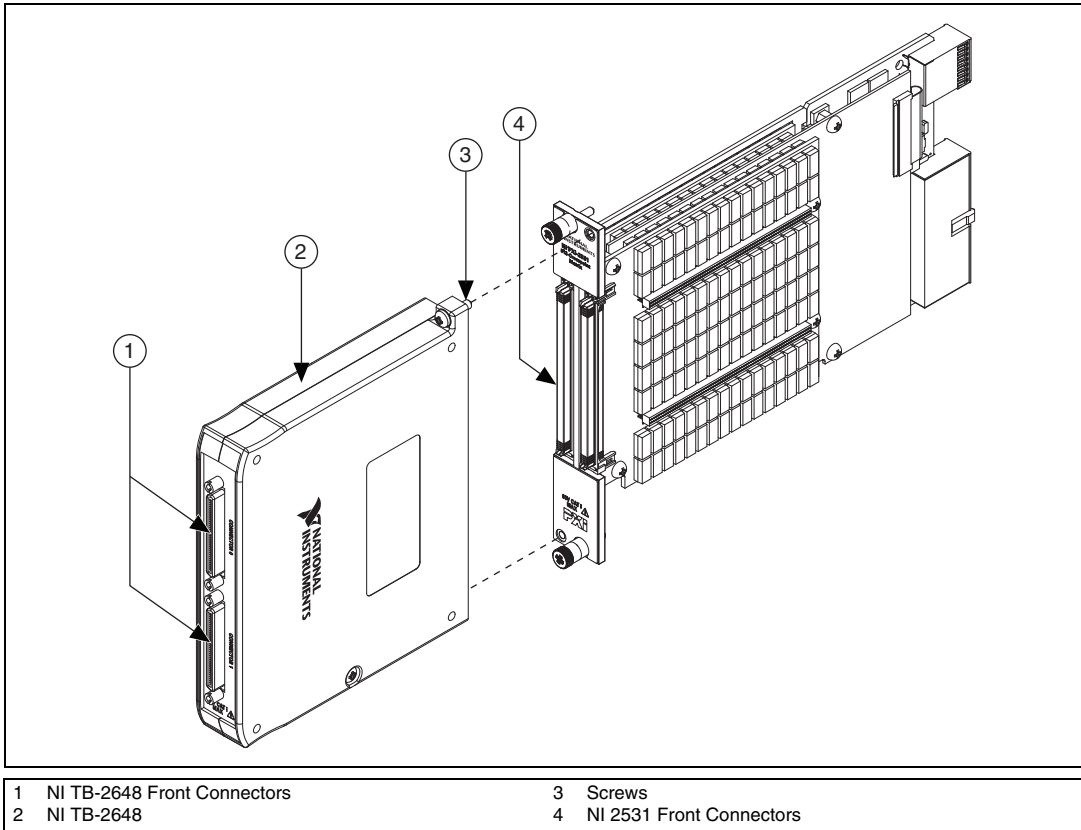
Installing the NI TB-2648/2649/2650/2651 Terminal Block
